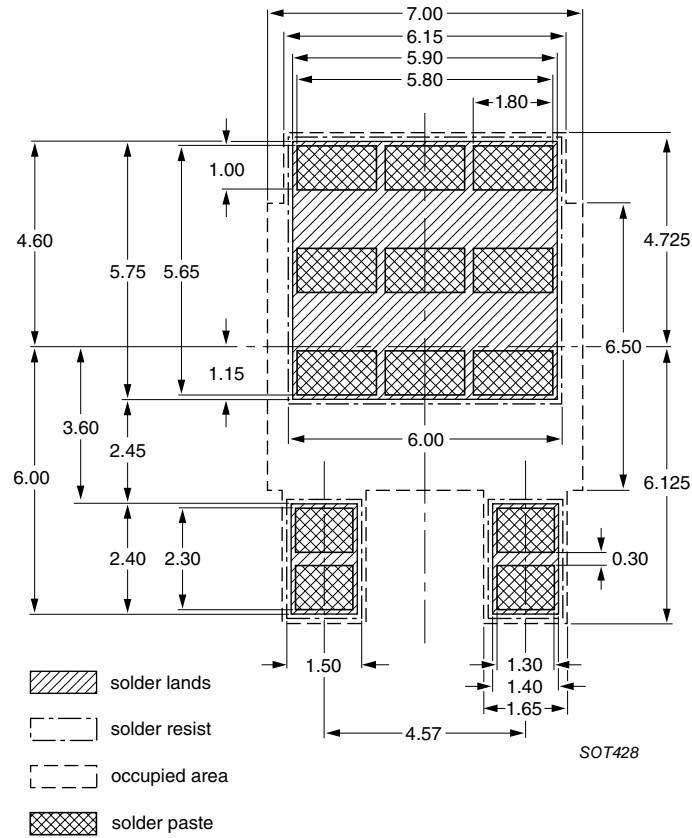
Reflow soldering footprint for SOT428 (DPAK)
